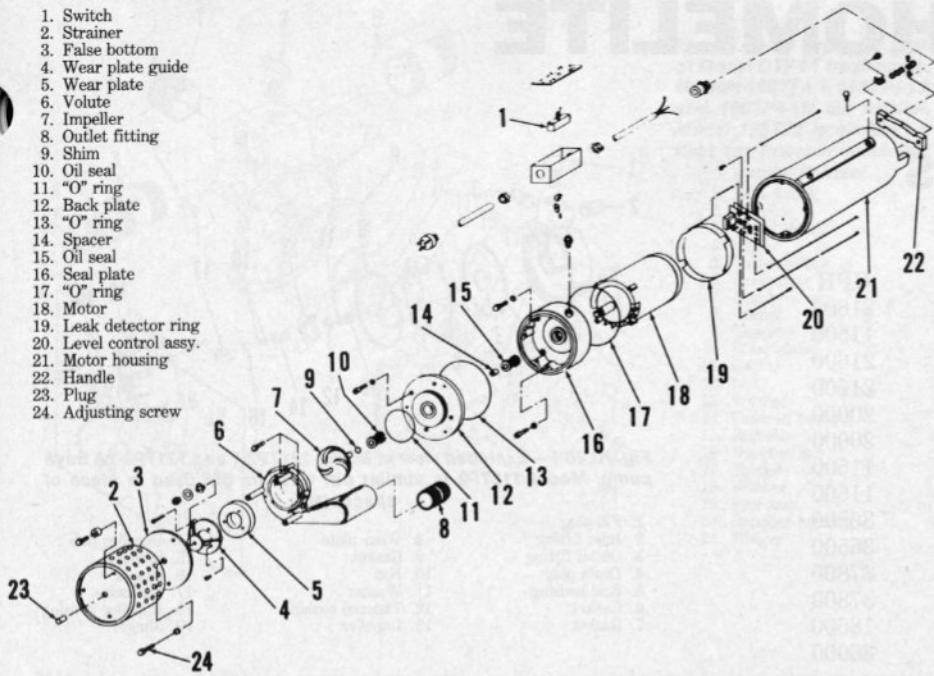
Exploded view of Models SP15-1, SP15L-1, SP16-1, SP16L-1, SP20-1 and SP20L-1. Components (19 & 20) are used only on models SP15L-1, SP16L-1 and SP20L-1.
